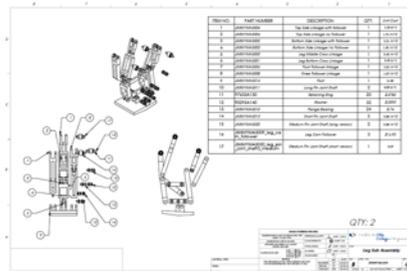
Mechanical drawing and parts list for JimmyM's leg
